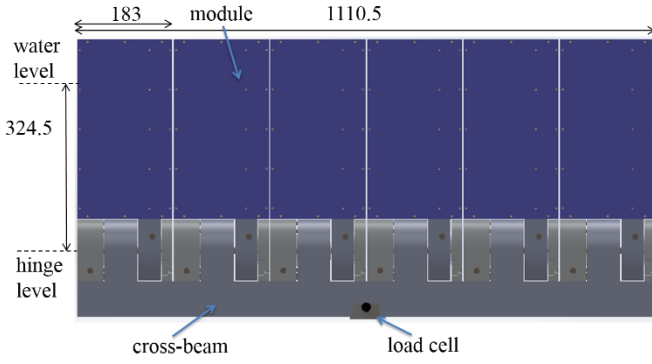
CAD model of modular flap with six modules, showing dimensions, in millimetres at model scale
